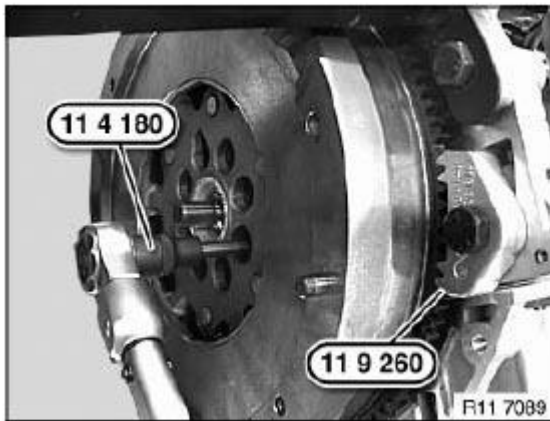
Releasing Flywheel Screws With Special Tool 11 4 180
